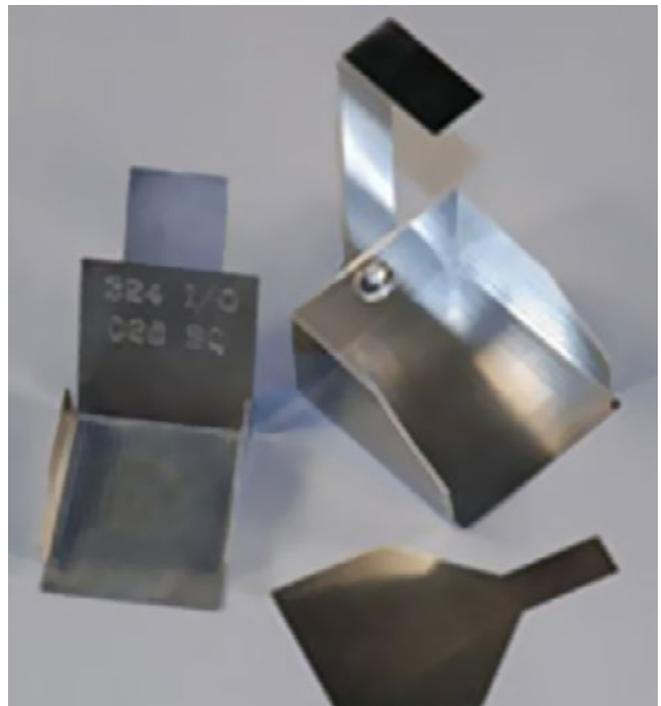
BGA/LCC/QFN/QFP package repair tooling can be used when spacing is limited between components already on the board.
